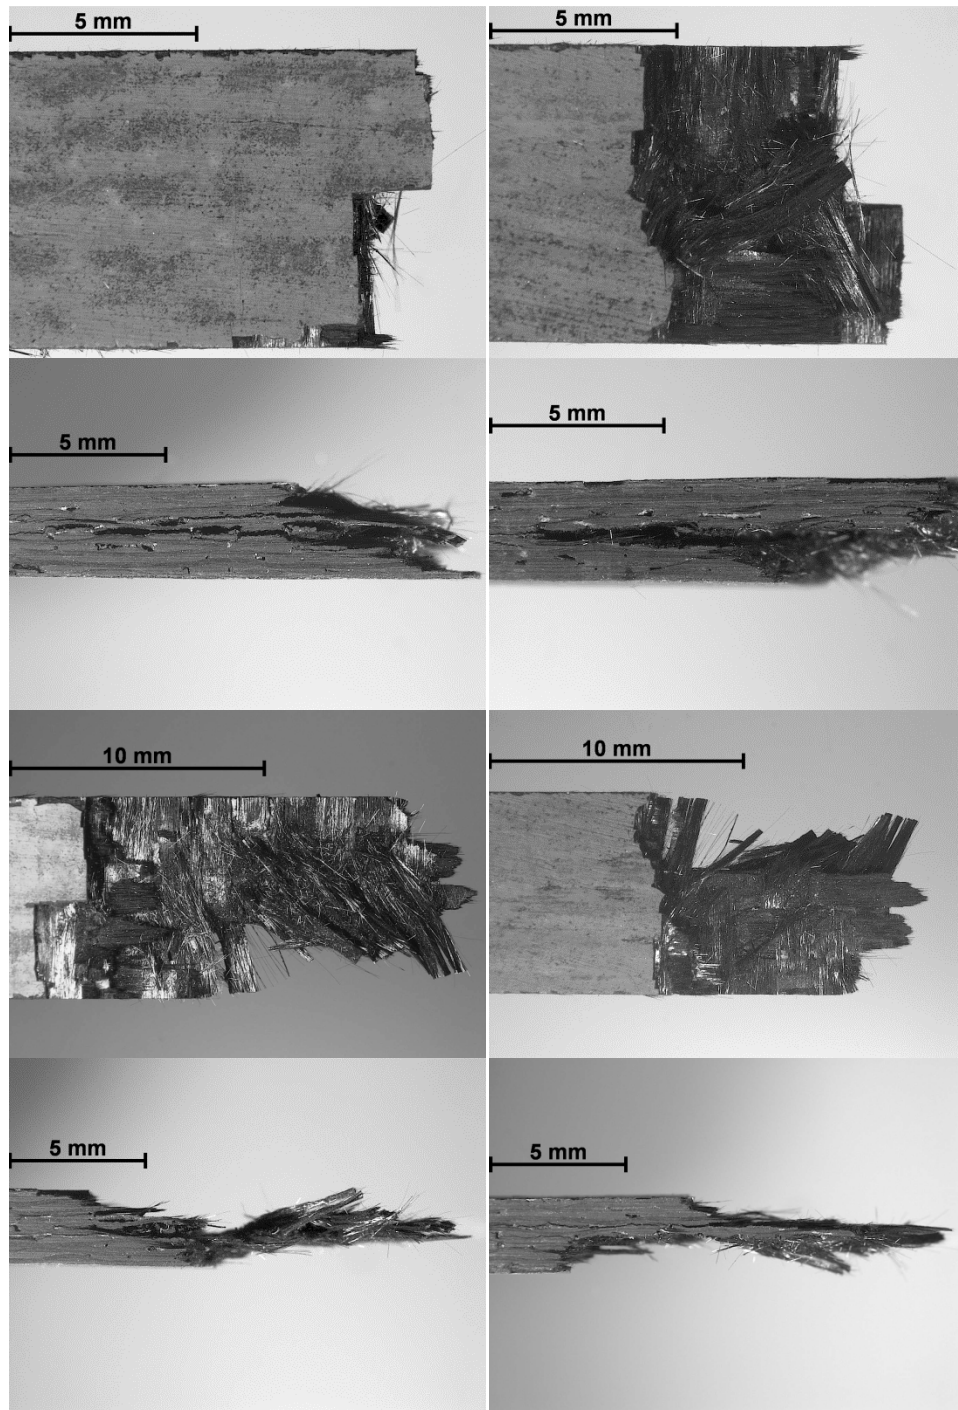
Fracture surfaces obtained in tensile test of C/SiC specimen subjected to prior heat treatment of 100 h at 1300°C (Plate 12015, Specimen 3)
